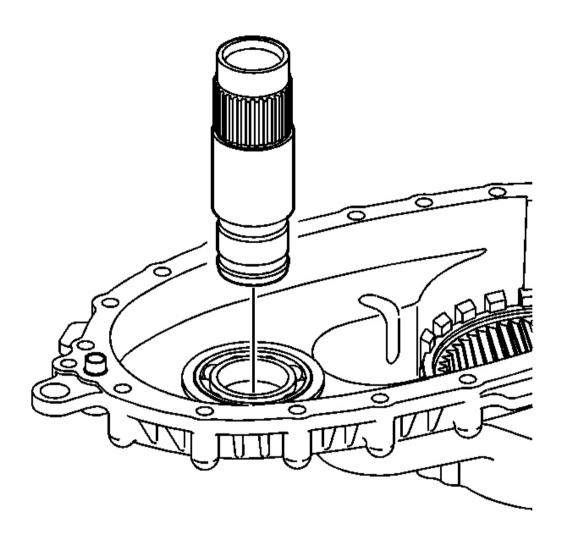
Front Output Shaft Assembly Courtesy of GENERAL MOTORS CORP.
